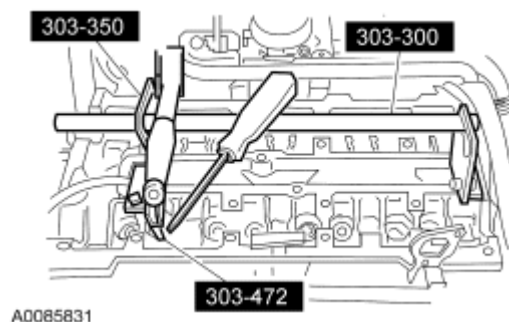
Identifying Special Tools (303-300, 303-350, 303-472)
